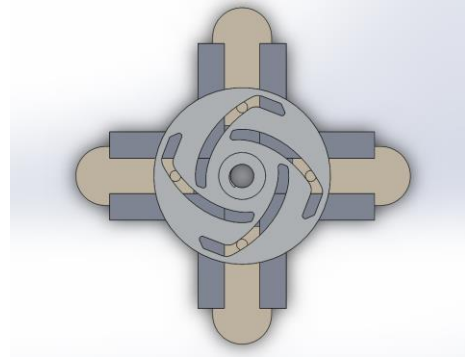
Four-follower face cam mechanism, the NDE transducers will be installed at the end of followers
